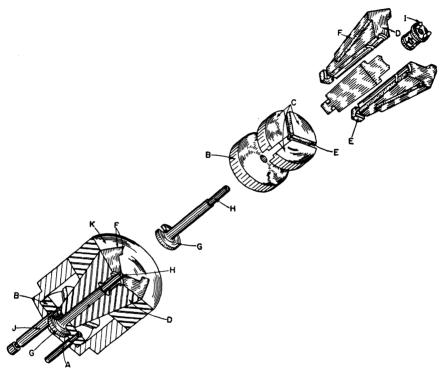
Exploded and assembly views showing how an angular-ejection die operates.
